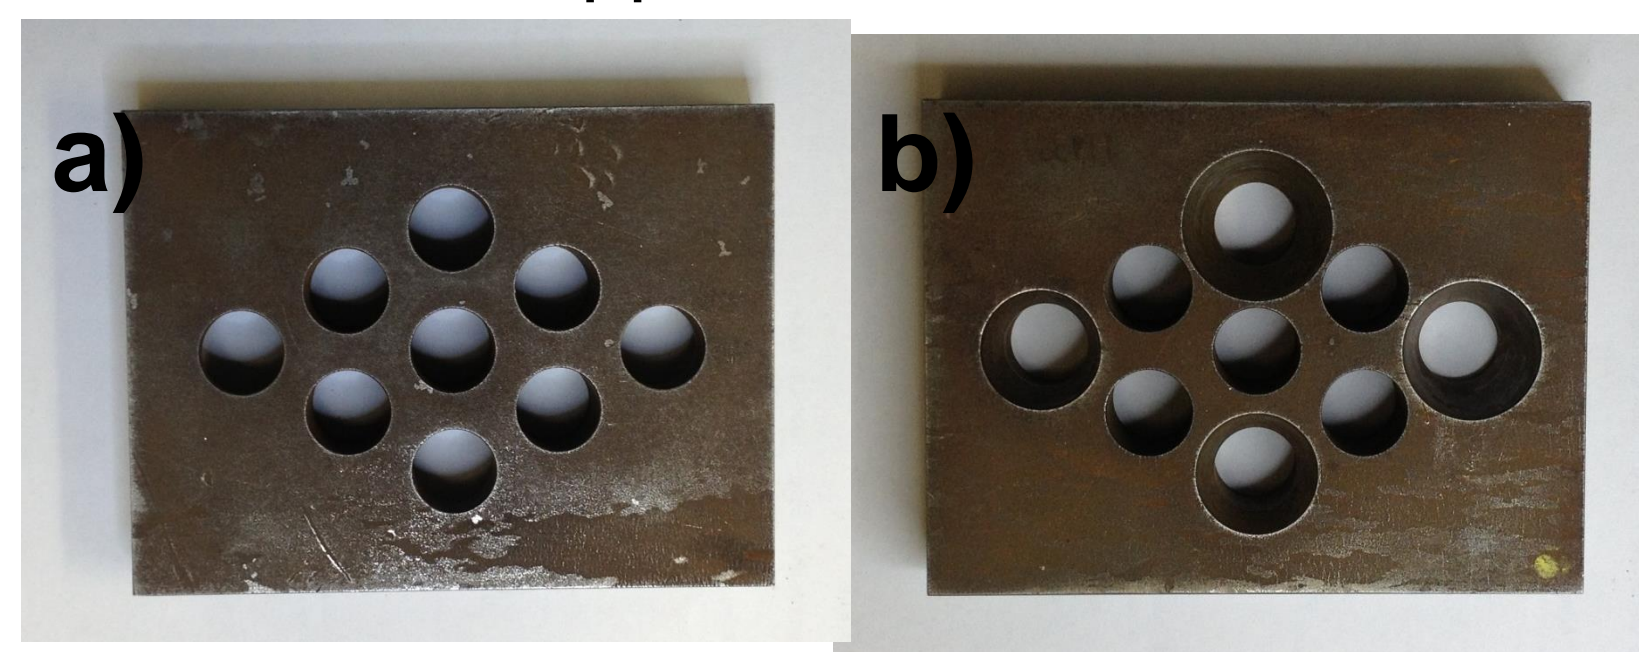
a) Tube sheet used in reactors. b) Tube sheet showing corrosion.
